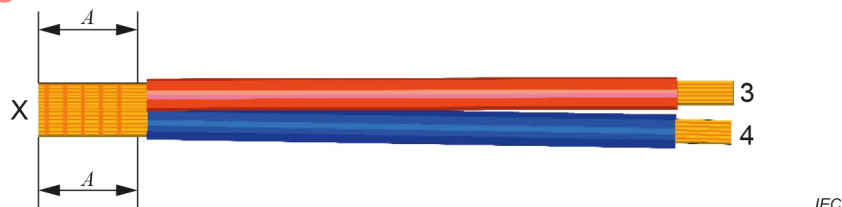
Type C specimen, end-splice connection with type 3 and type 4 wires
